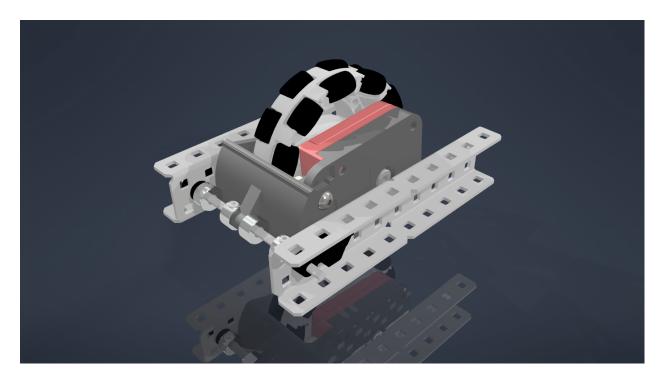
Full Subassembly with the omni wheel, shaft encoder, and custom part
